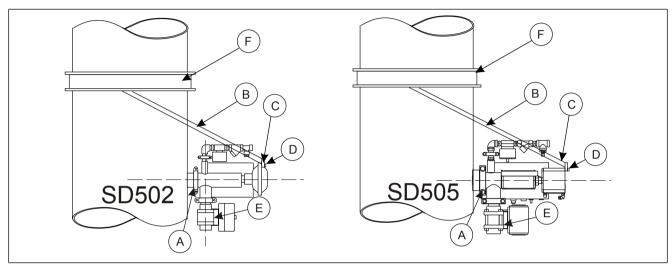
Supporting the Valmet SD502/SD505 sampler to the process pipeline: A - mounting clamp, B - support pipe, C - support piece, D - mounting screws, E - sample delivery valve, F - pipe clamp.
